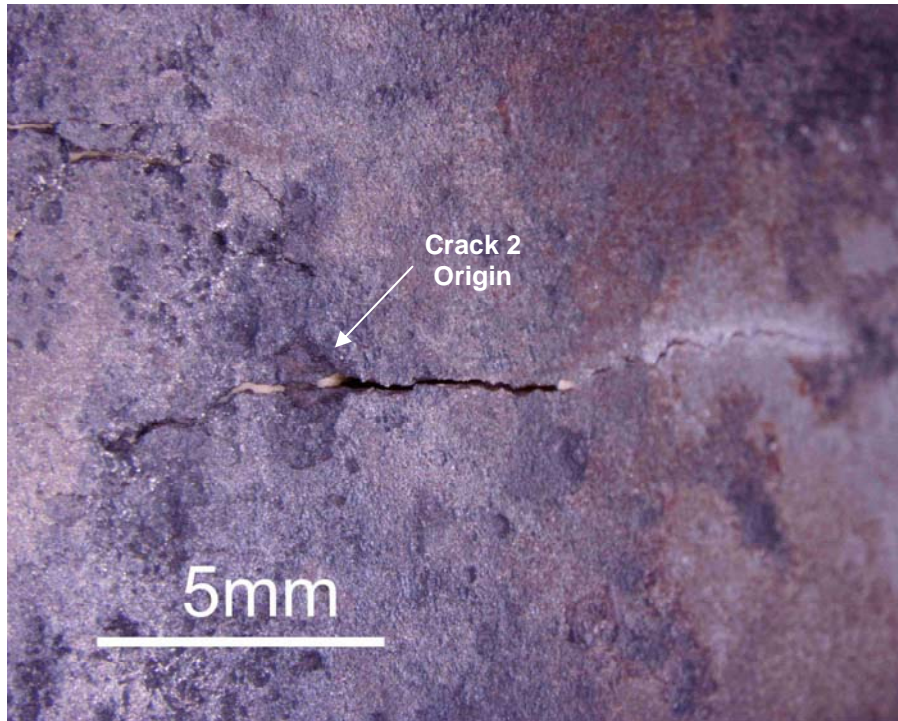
Second Fatigue Crack on Corroded Inner Surface of Shank PT0099
